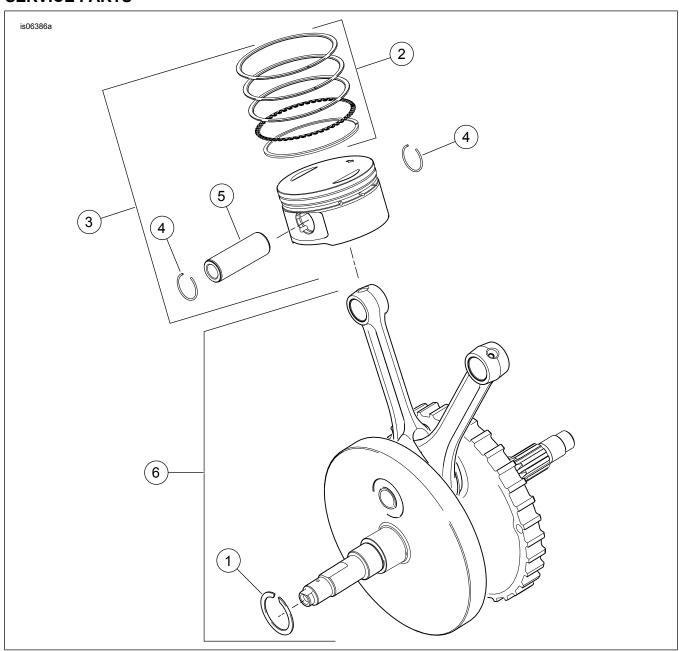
SE120R Screamin' Eagle Pro Crate Engine (Beta) Pistons and Flywheel
